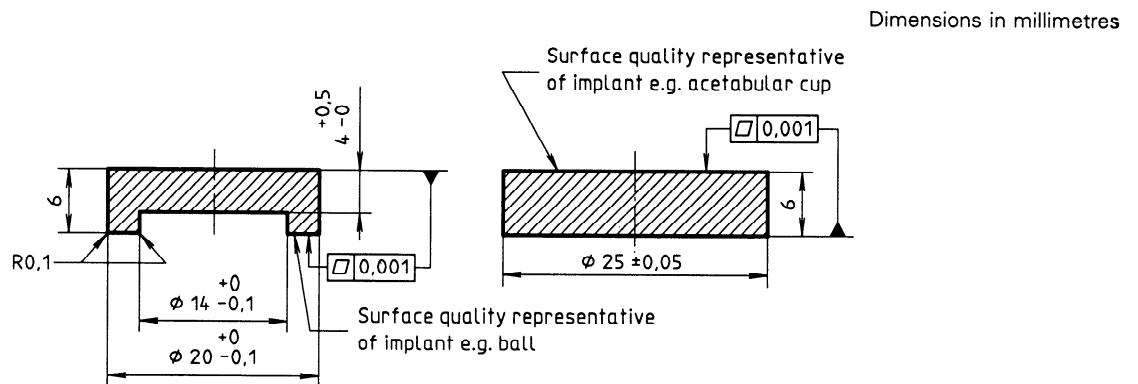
Geometry of ring and disc test pieces with necessary dimensions defined
